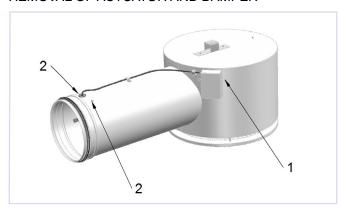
, Unscrew the print card cover (1). Disconnect the actuator wires on the print card. Unscrew the two screws on the actuator support on the spigot (2). (Screw direct on the actuator, dimension 125). Remove the front. (MI)
